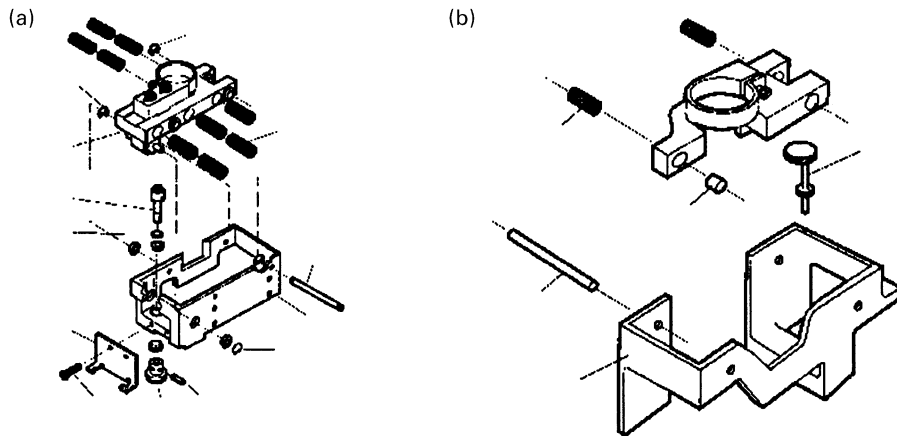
Reticle assembly (Stoll, 1988a,b), (a) traditional reticle design (b) reticle design using DFA.
